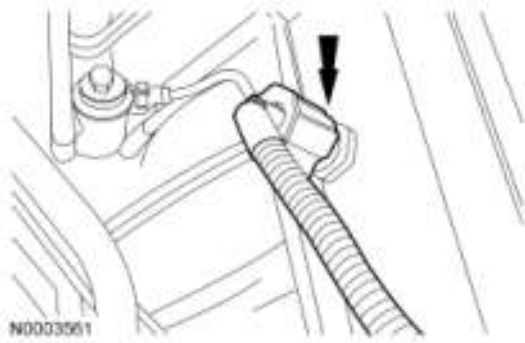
Locating Electrical Connector Retainer At Coolant Tube Support Bracket
